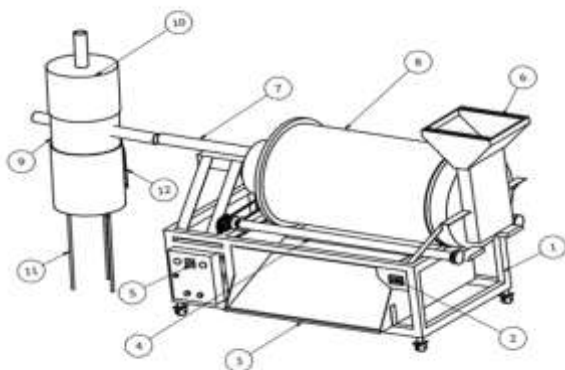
Research tool scheme, 1. Frame, 2. temperature control, 3. coffee bean ejector, 4. roll support, 5. motor rotation control, 6. turmeric slice input place, 7. hot air duct, 8. drying cylinder, 9. heat exchanger, 10. burner, 11. burner foot, 12. Burner door
